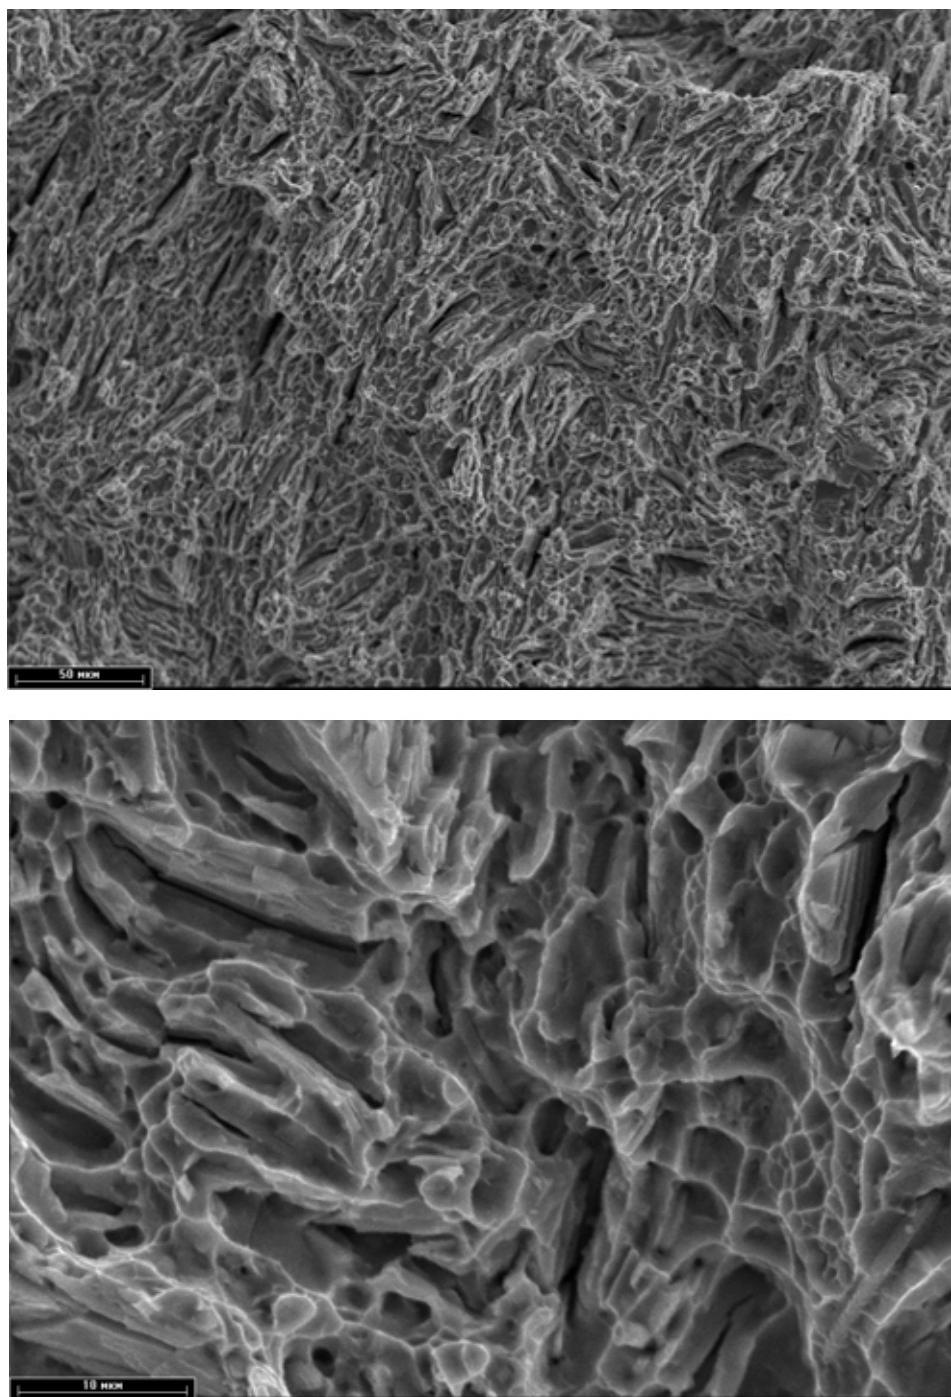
Fracture surface of 2.5 specimen (β -rolled condition).
